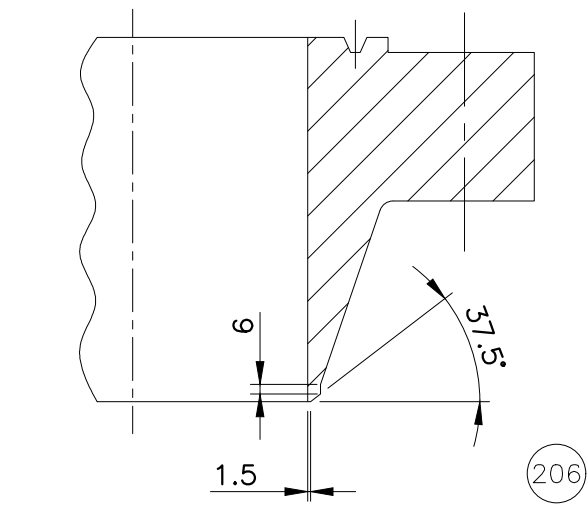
DETAIL OF FORG. NECK TO CHANNEL DRUM WELD
